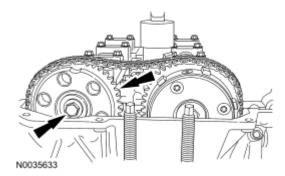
Locating Exhaust Camshaft Drive Gear Bolt
